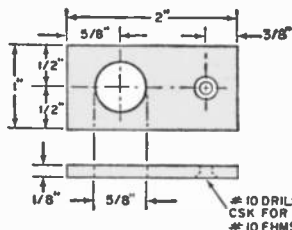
Grounding stub mounting plate can be fabricated from either brass or aluminum.
